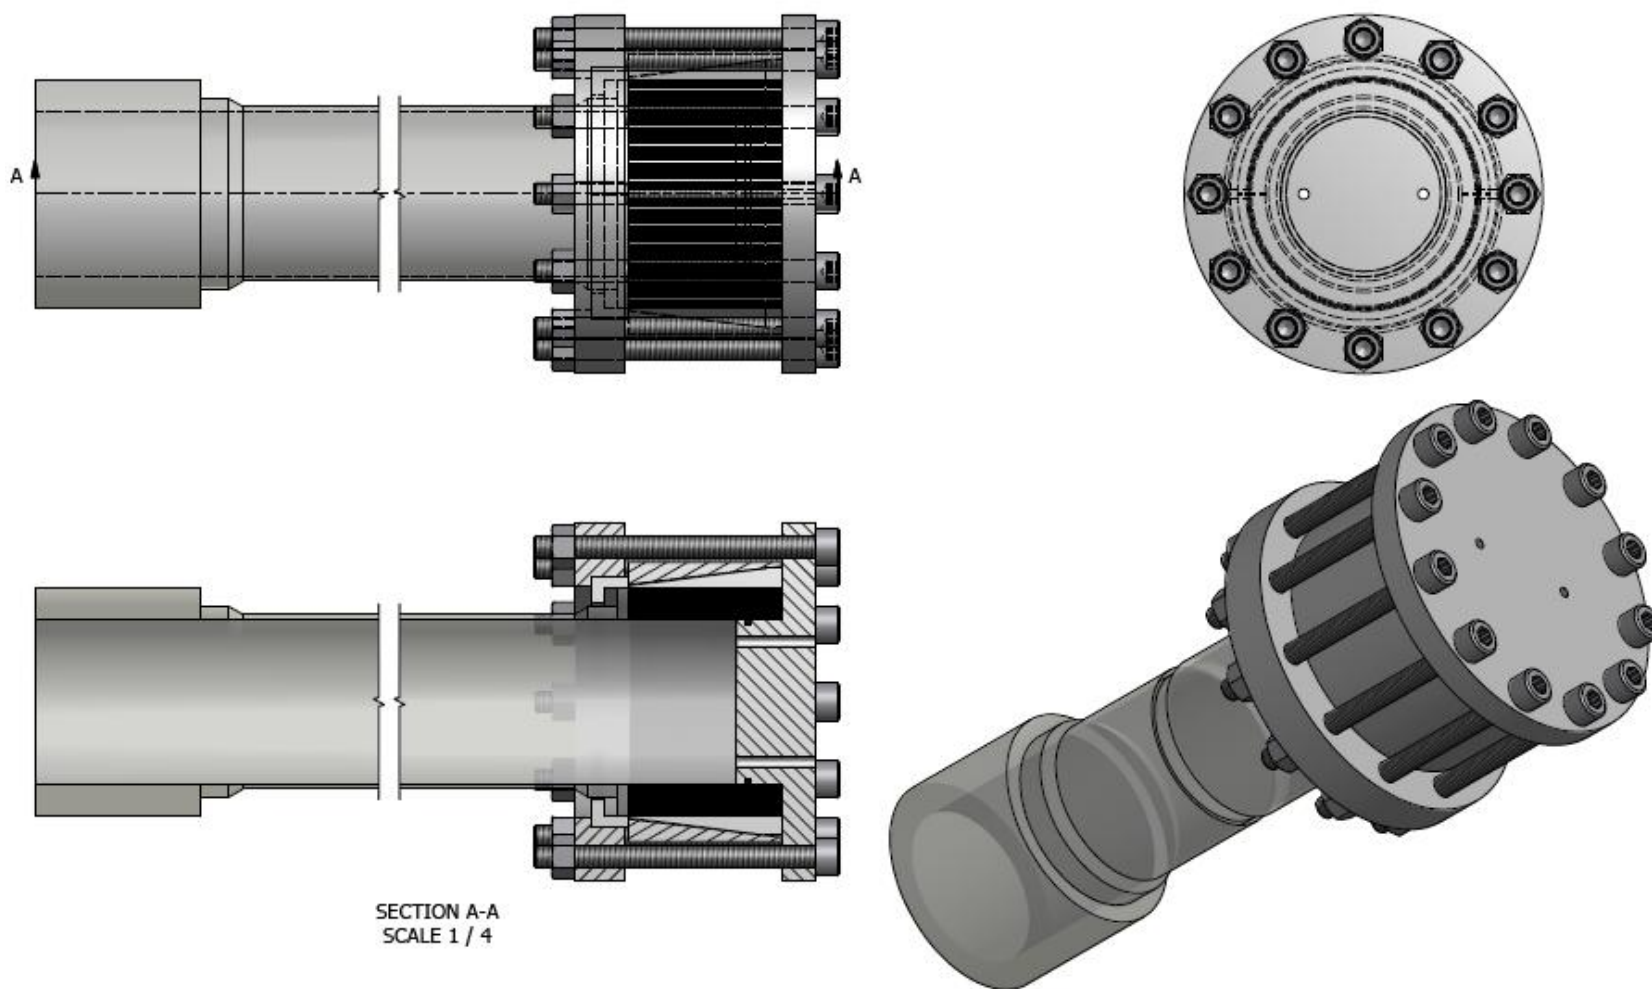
Design of the mechanical end fitting used for UEWS tests at 95°C
